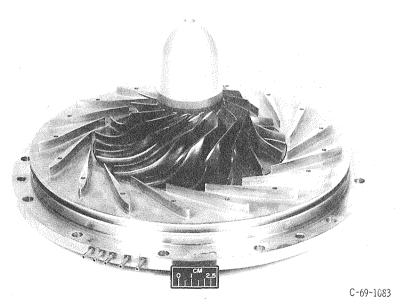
Centrifugal compressor impeller and vaned diffuser.
